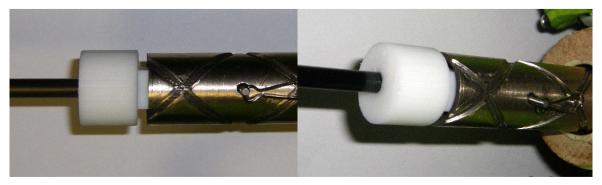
CONNECTION BETWEEN THREADED SHAFT AND CARBON FIBER TUBE
